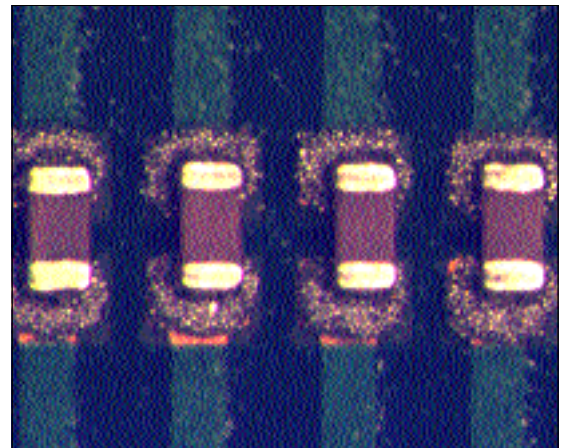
0201 Components Placed on Wet Solder Paste on Attachment Pad Design CEG
